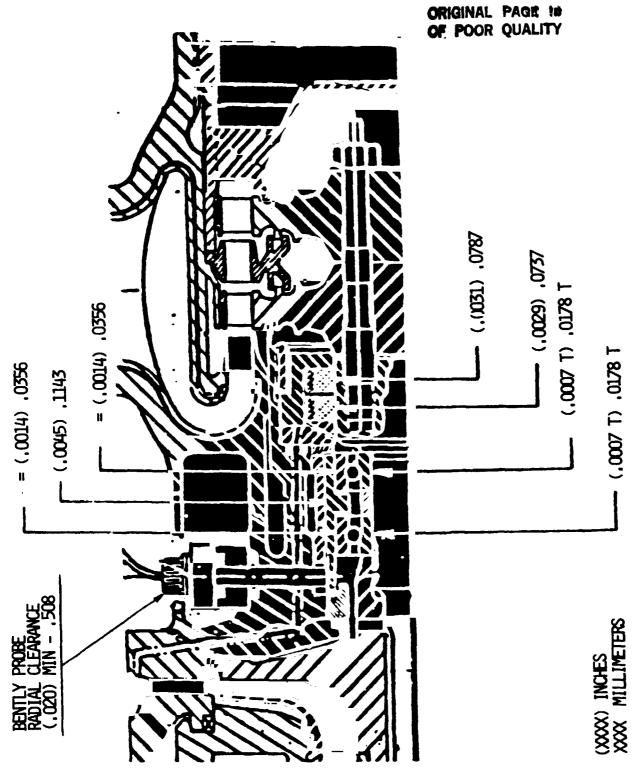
Mark 48-F Turbine-End Bearing and Seal Diametral Clearance and Fits
